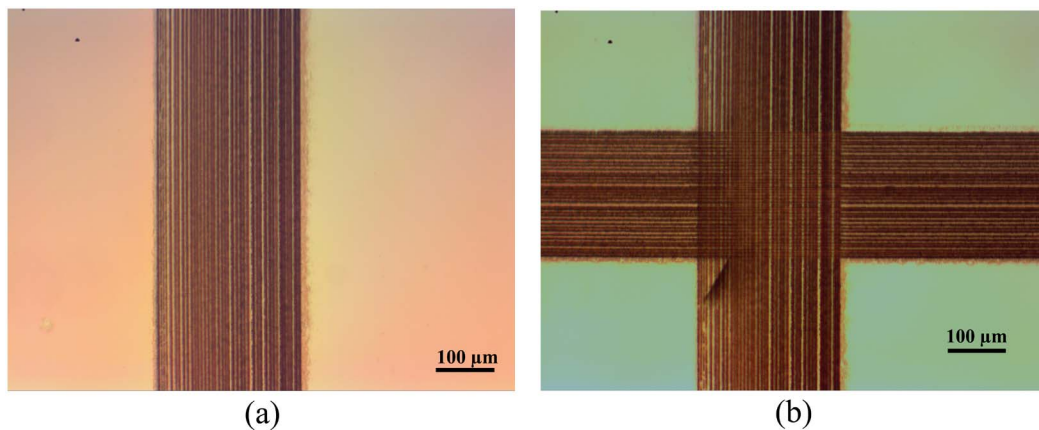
(Color online) Microscopic view of USP laser four-edge sealing of two fused silica samples ( $F_{\text{ave}} = 26.5 \text{ kJ/cm}^2$ ): (a) one of the sealing seam composing of multiple welding lines, and (b) one of the intersections of two sealing seams.
